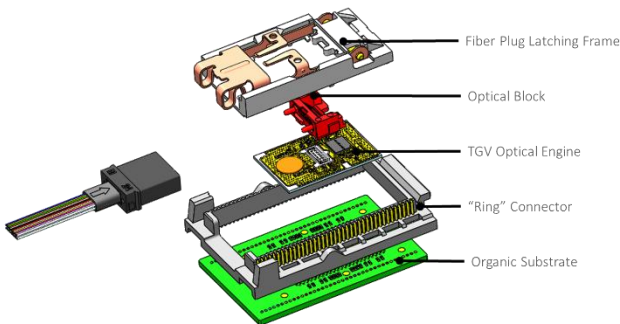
Exploded CAD View of an Optical Transceiver Using TGV
